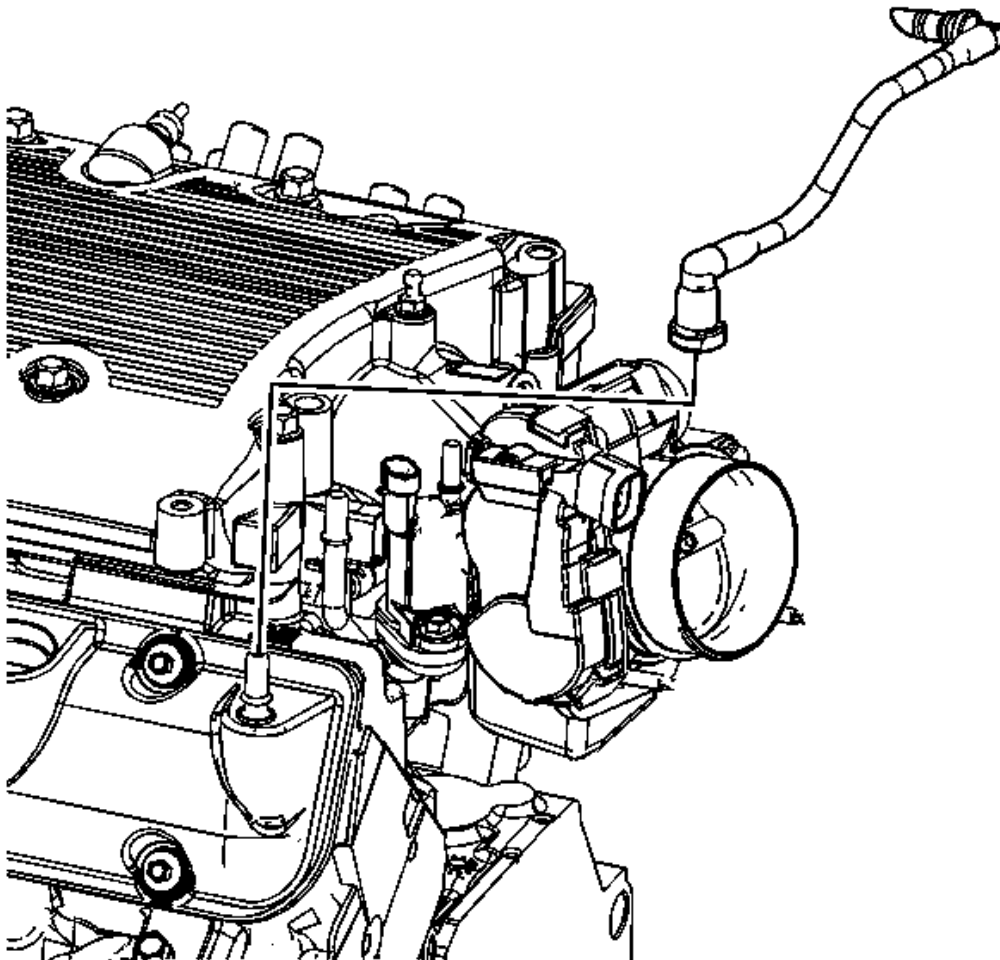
Positive Crankcase Ventilation (PCV) Tube
